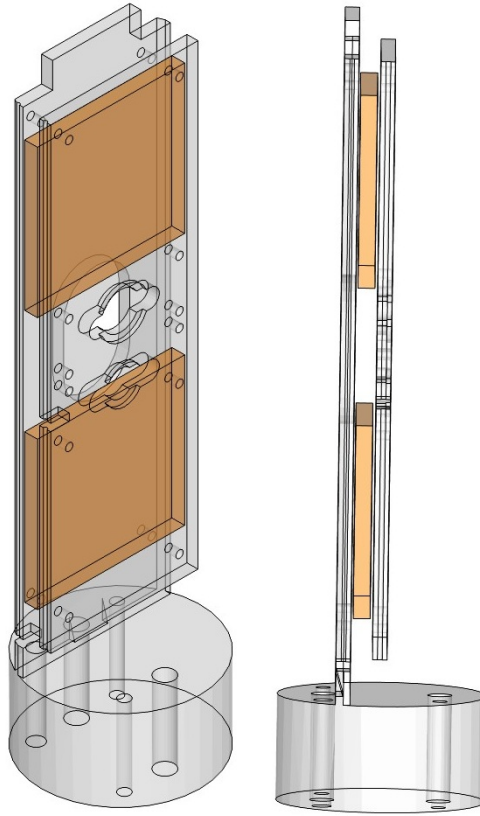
Sample holder. Technical drawing and sketch were made in Salome 5.1.4 [7] and 3D-Tool [8]. Orange color is used to display Peltier elements.
